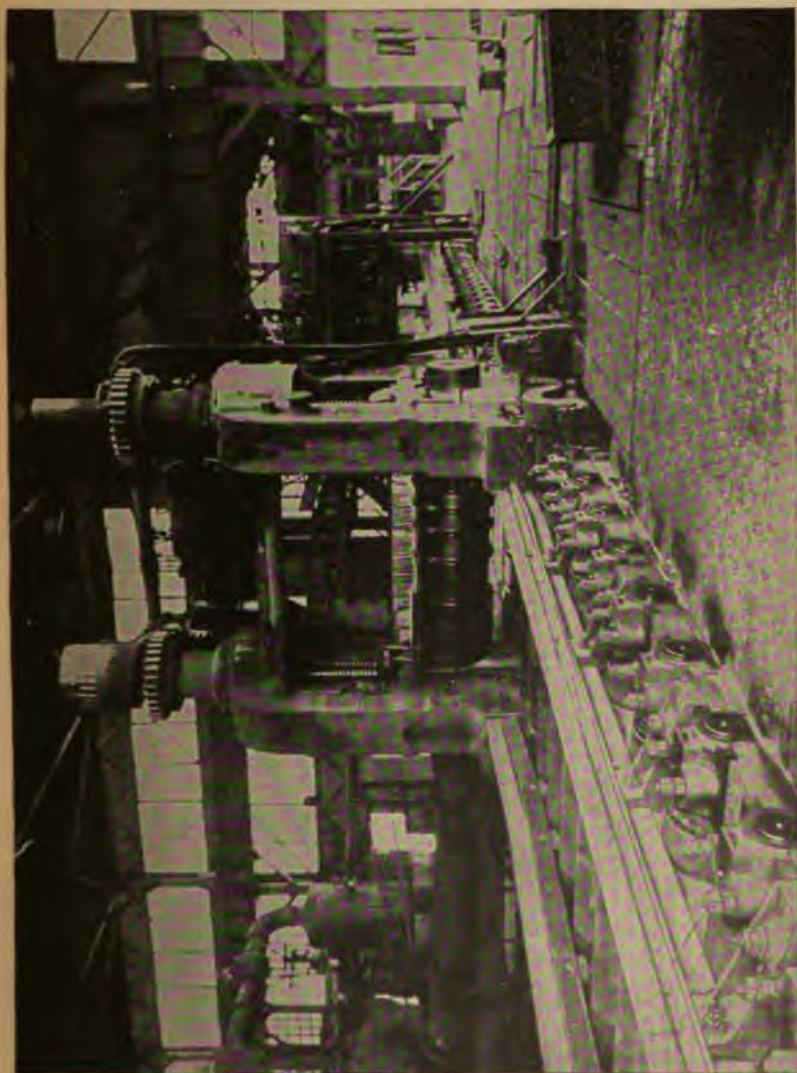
Typical Blooming Mill, Showing Forming Rolls Mounted in the Machine
